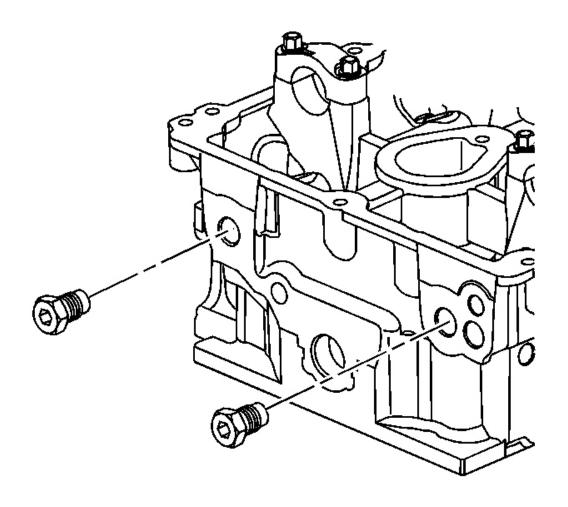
Locating Oil Gallery Plugs Courtesy of GENERAL MOTORS CORP.
